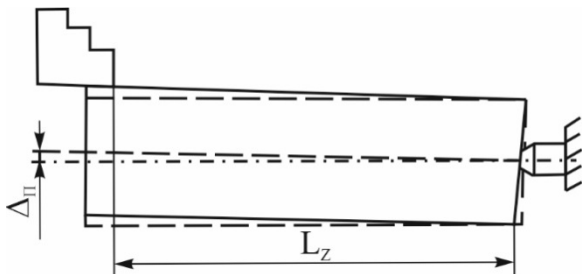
Displacement of the workpiece as a result of its establishment in the chuck of the machine.
